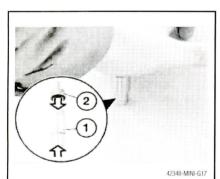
Reassembling timing chain tensioner clamping fixture—Cooper Coupe
